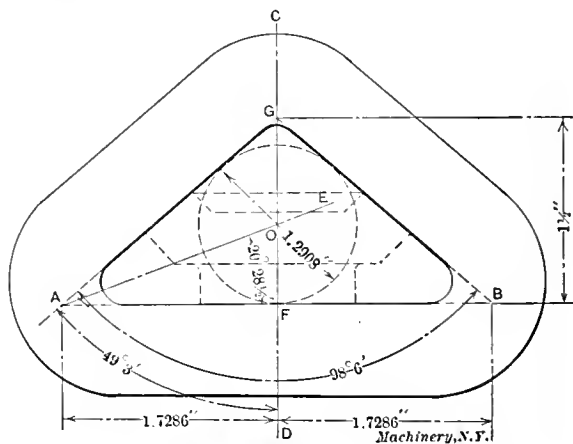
Gage for Miter Gear with Long Hub in Fig. 1.
